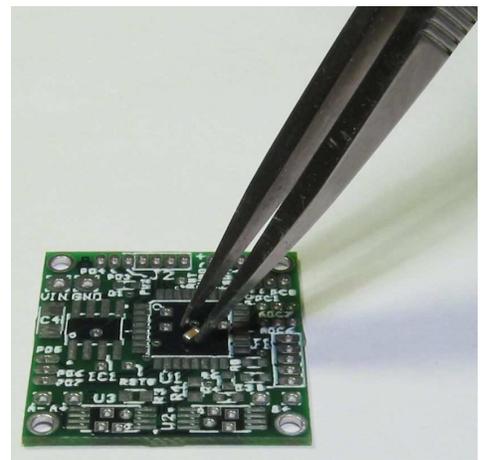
Fine tipped tweezers are necessary for soldering small parts.
